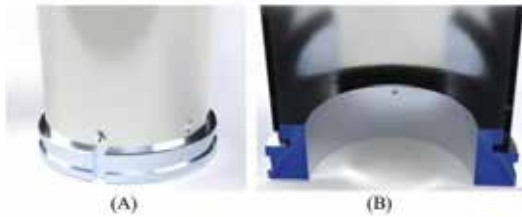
(A) installation of lower flange 2 onto tube 2 and (B) section view
